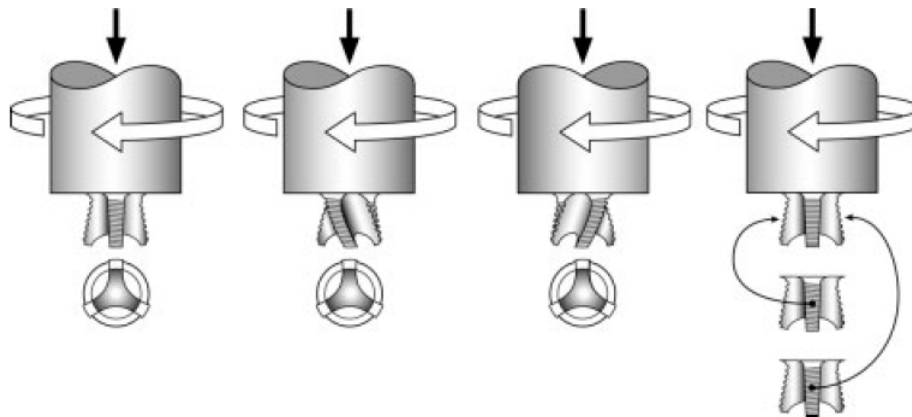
Worl™ and MX Triflute™ tools developed by The Welding Institute (TWI), UK [128].
